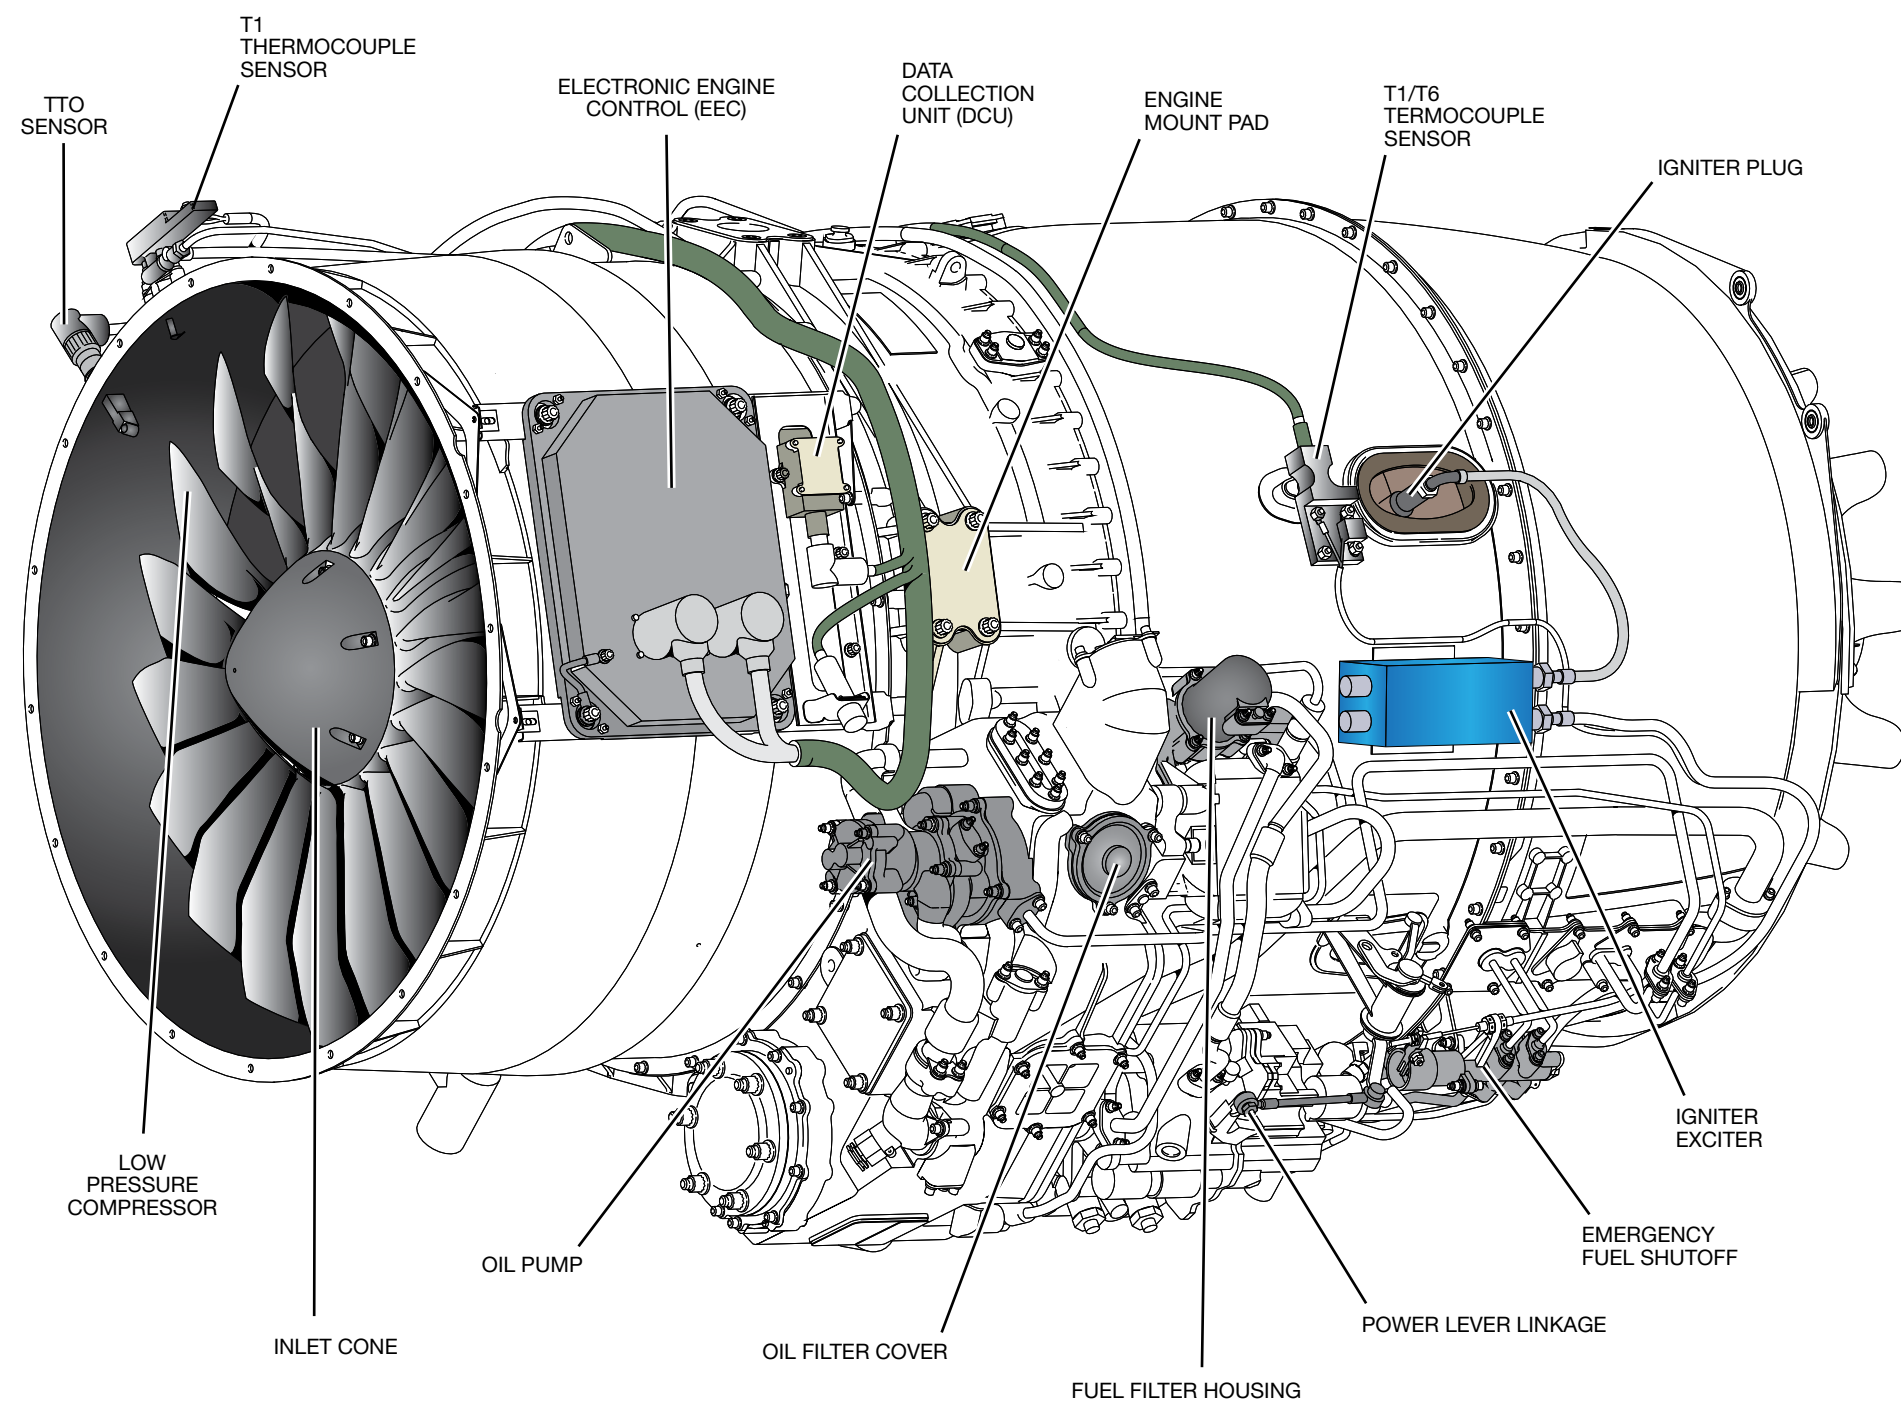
PW545 A/B Engine (Sheet 1 of 2)
